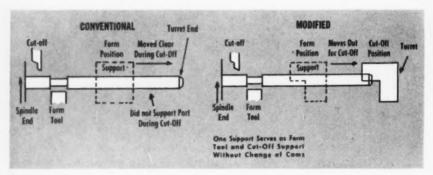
By modifying the bushing support to a half round shape as shown in this sketch, the same support was used for both form and cut-off tools with considerably better results.
